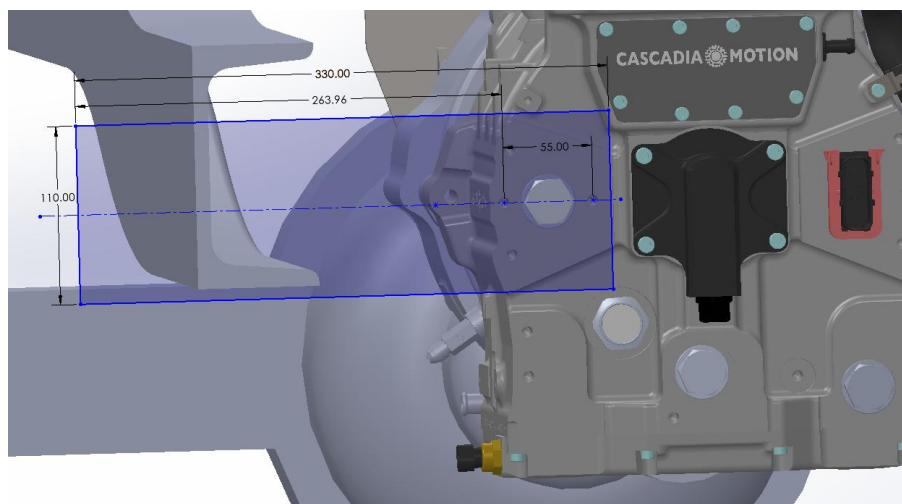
Bracket Design Space and Dimensions (blue sketch area)
